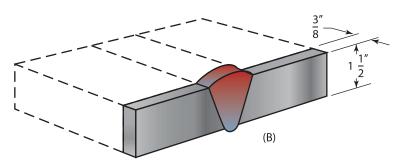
Root and face bend specimens for 3/8-in. (10-mm) plate.
